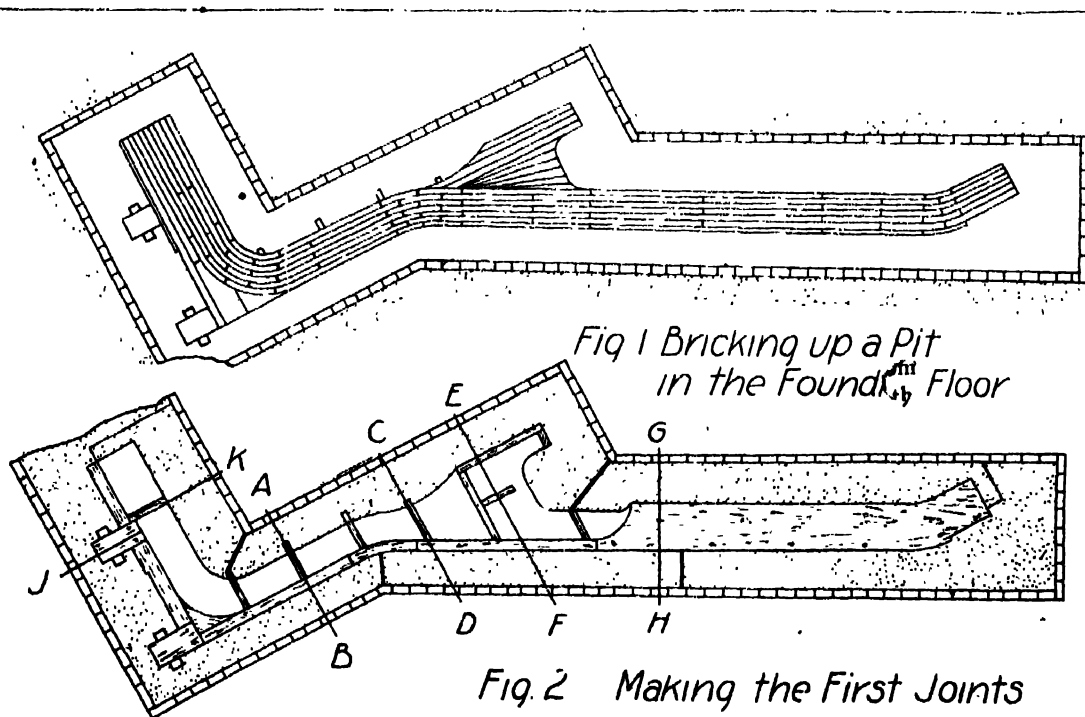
A TEMPORARY PIT BRICKED UP IN THE FOUNDRY FLOOR. FIG. 2—THE PATTERN AND PIT AFTER THE FIRST JOINT IS MADE
